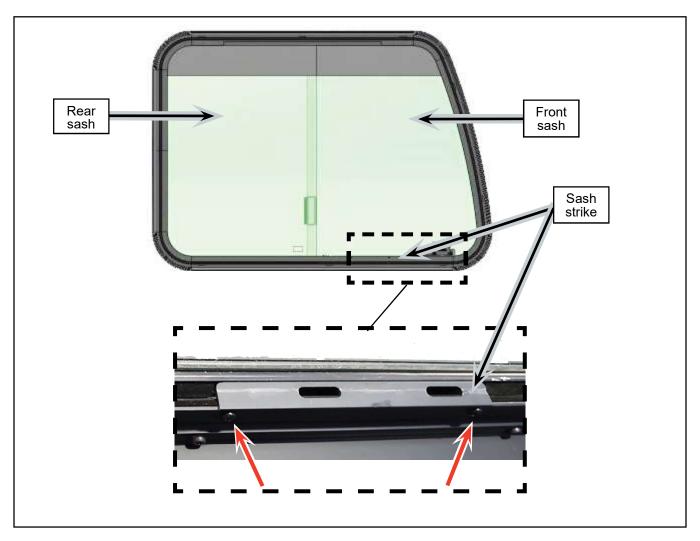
Remove the Screws to Remove the Sash Strike (Your Configuration May Differ)
